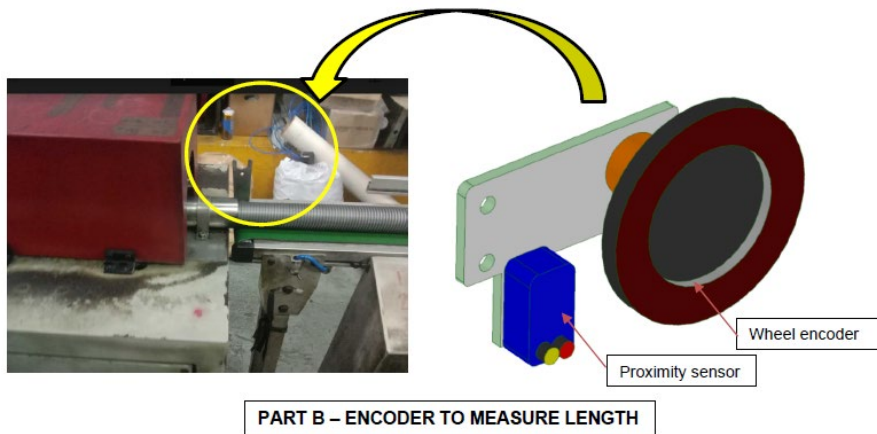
Wheel encoder and proximity sensor designed by sketch
